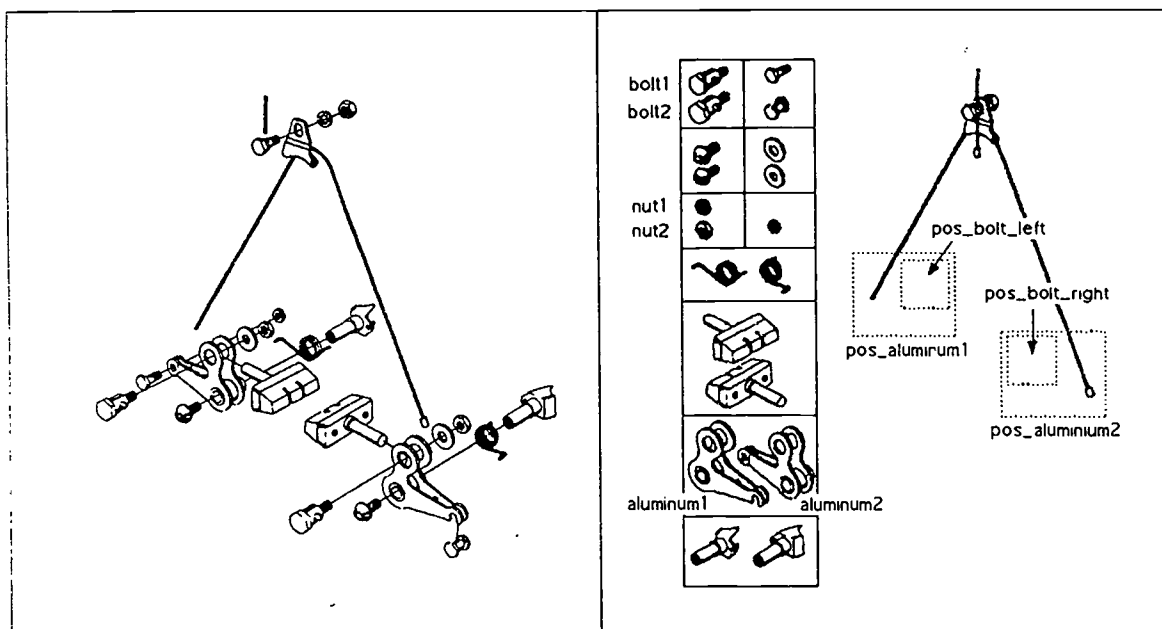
This is an example of a bicycle brake that has to be assembled by snapping each part with the mouse and dragging it to its corresponding position on the right side of this figure.
